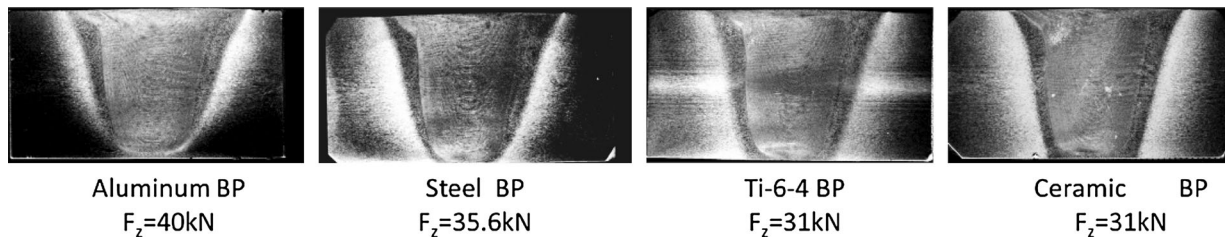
Transverse etched cross-section of welded samples. Backing plates and forge force used in each case is indicated.
